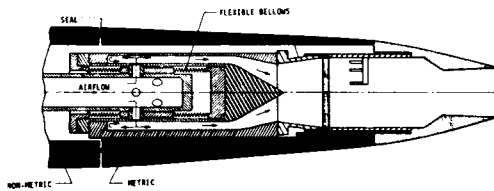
INTERNAL FLOW THROUGH BALANCE ASSEMBLY (REF. 3.3.42)
